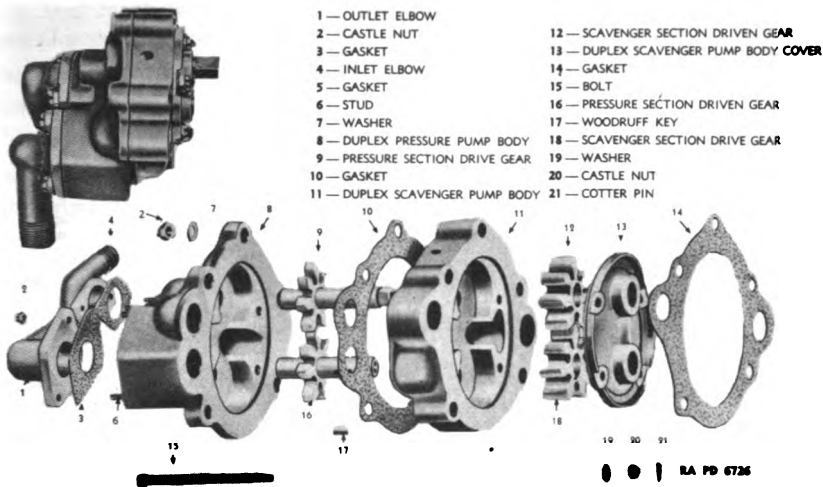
Radial Engine Combination Pressure and Scavenger Gear-type Oil Pump.
